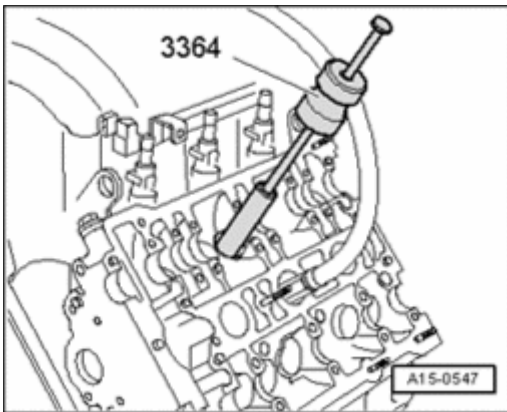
Removing Valve Stem Oil Seals Using Valve Seal Removal Tool 3364
